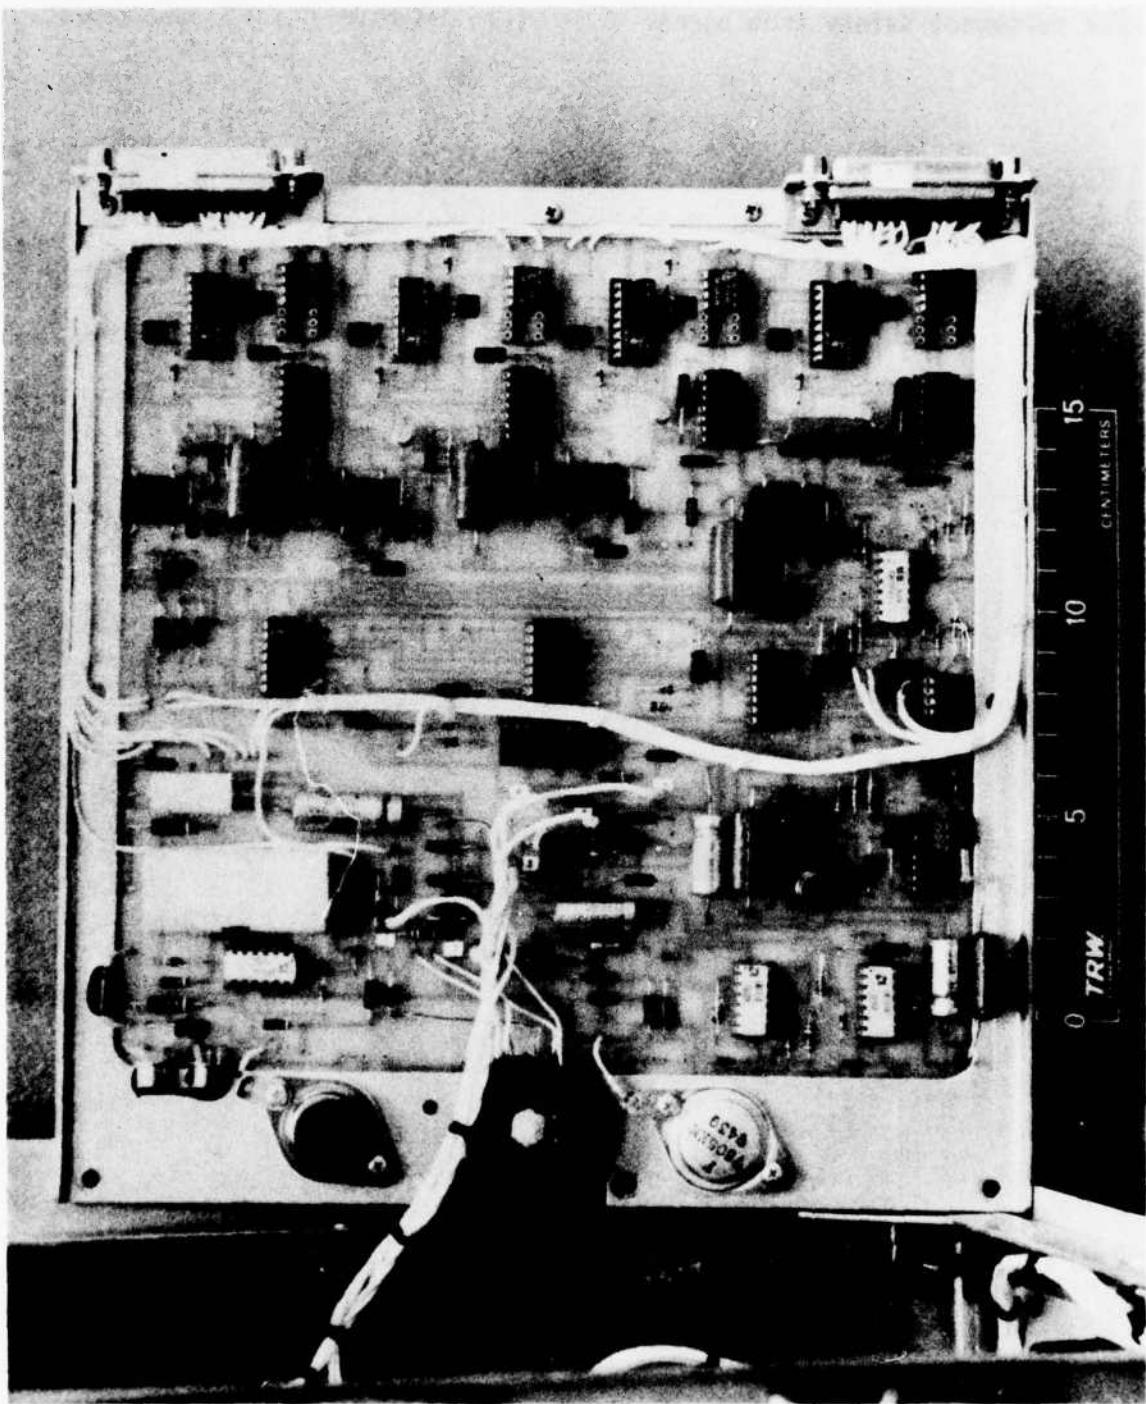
PRINTED CIRCUIT BOARD FOR CONTROL ELECTRONICS
